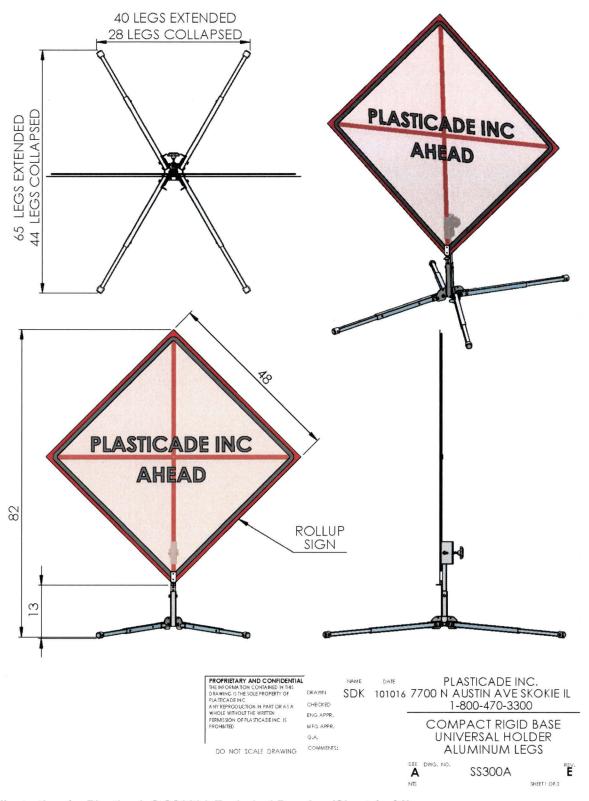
Plasticade® SS300A Technical Drawing (Sheet 1 of 3)
